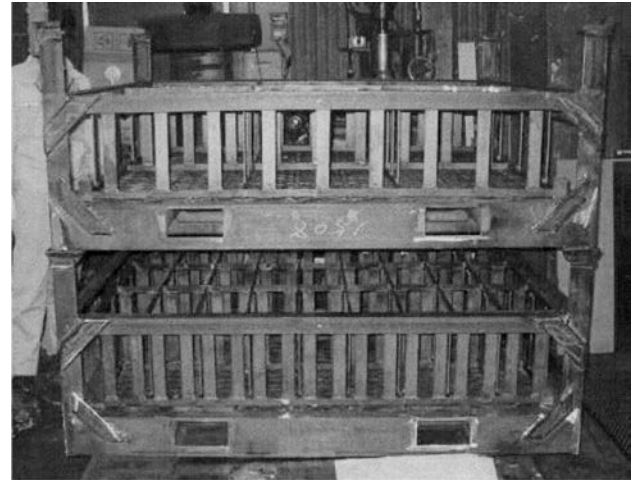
Welded basket for annealing of gearbox bodies [3, 10]; the gearbox bodies are placed in separate compartments of the basket
